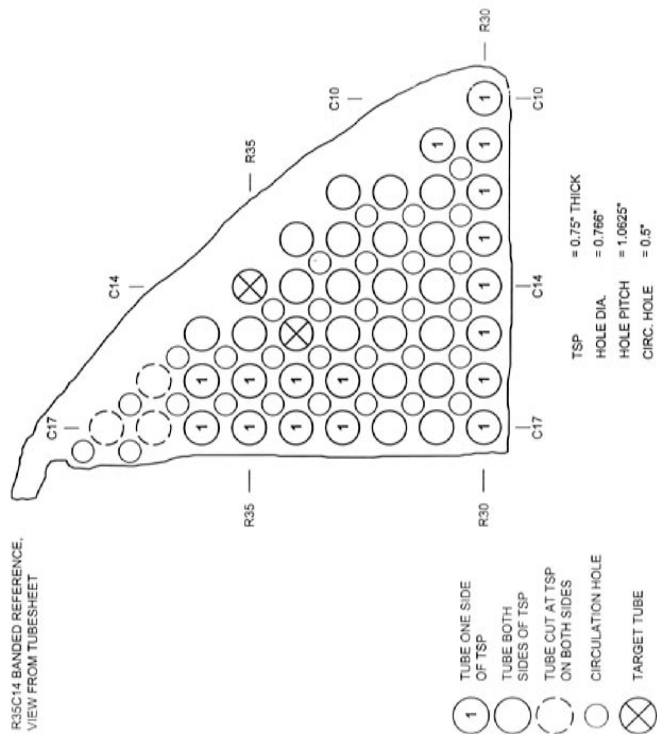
Tube support plate section TSP2 removed from SGB.
